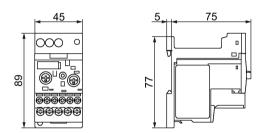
3RB3.1.-..B0 and 3RU2916-3AA01
